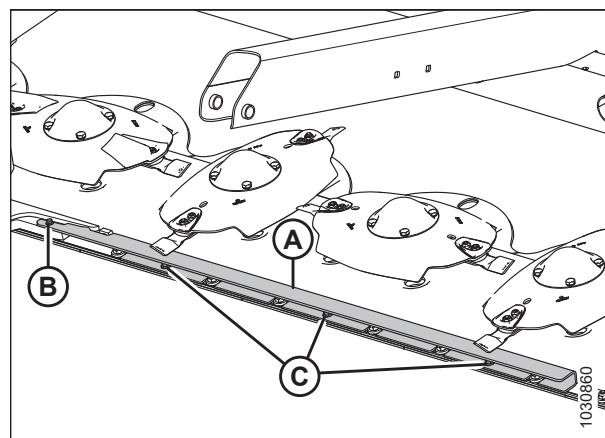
Left Deflector Plate Installed on Aft Edge of Cutterbar – View from Rear
